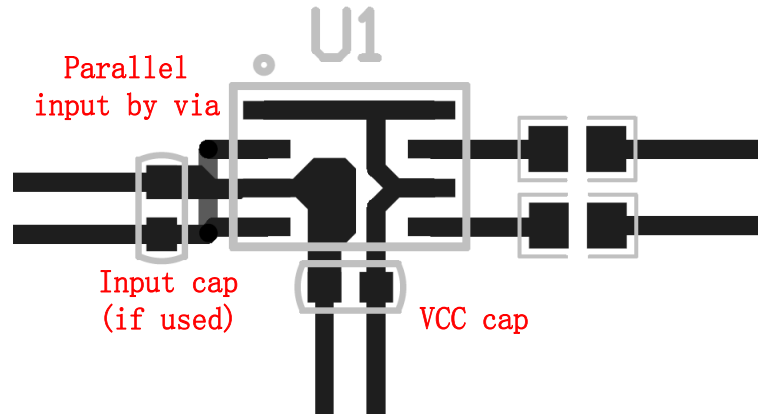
PCB Layout Example with Paralleled Inputs for SOP-8 Package
